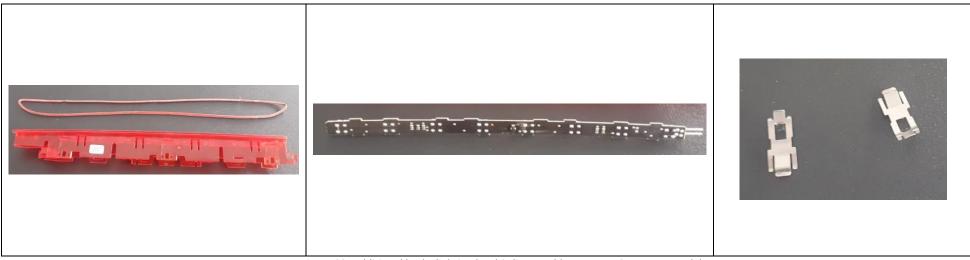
Additional brake lighting level 2 disassembly process – SEAT Leon model III
